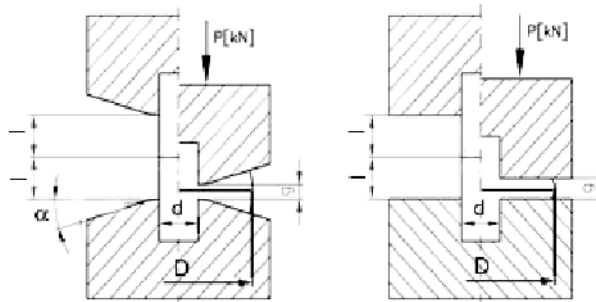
A diagram of butt cold pressure welding of rods by the method of upsetting with conical and flat dies; angle α can be positive or negative
